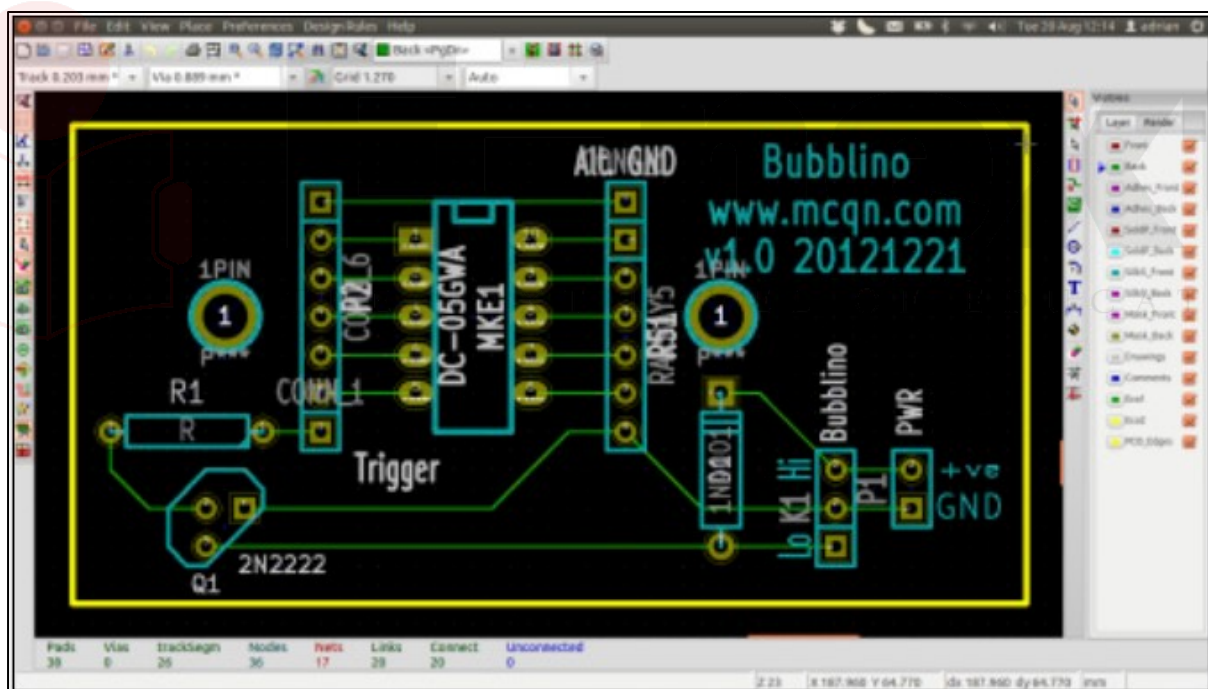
The finished View of Bubblino PCB board, ready for export.
